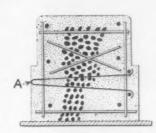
Body core on plate immediately after withdrawal of box; A is the lifting loop.
